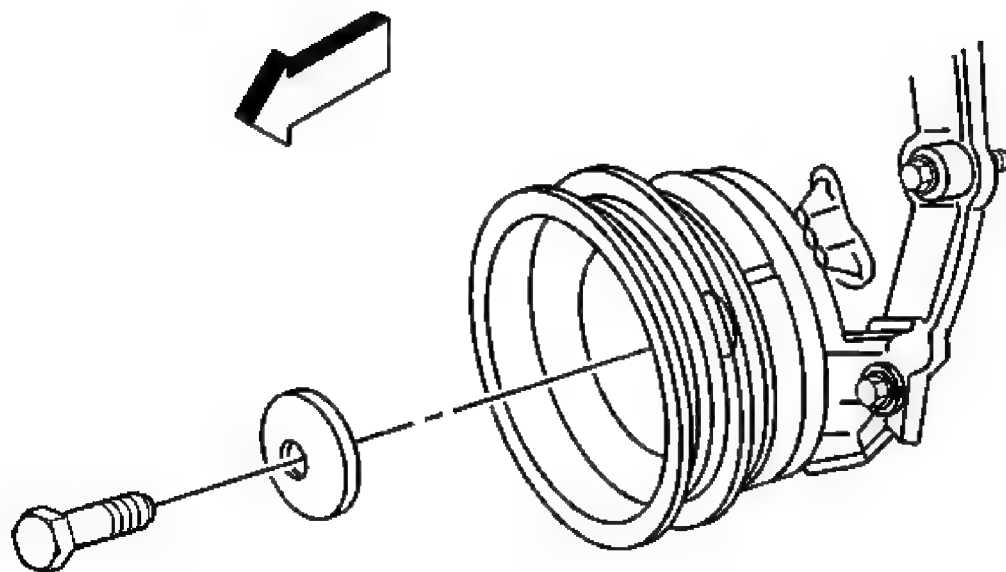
View Of Crankshaft Balancer Washer & Bolt
